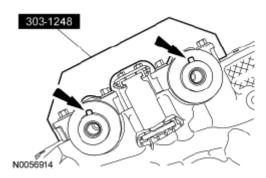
Locating Lockpin Courtesy of FORD MOTOR CO.
